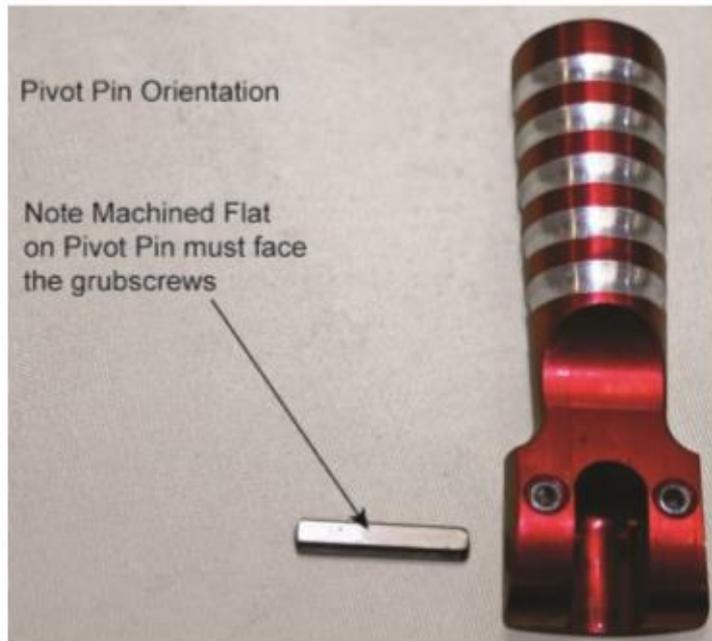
VORTECH HANDLE DISASSEMBLY
